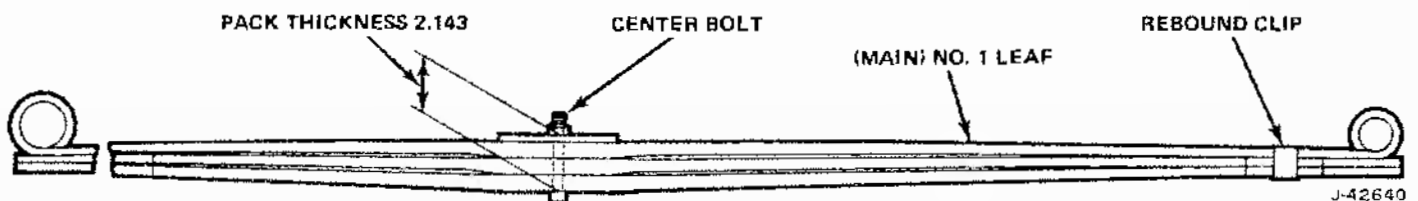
Rear Tapered Leaf Spring Assembly-Typical
